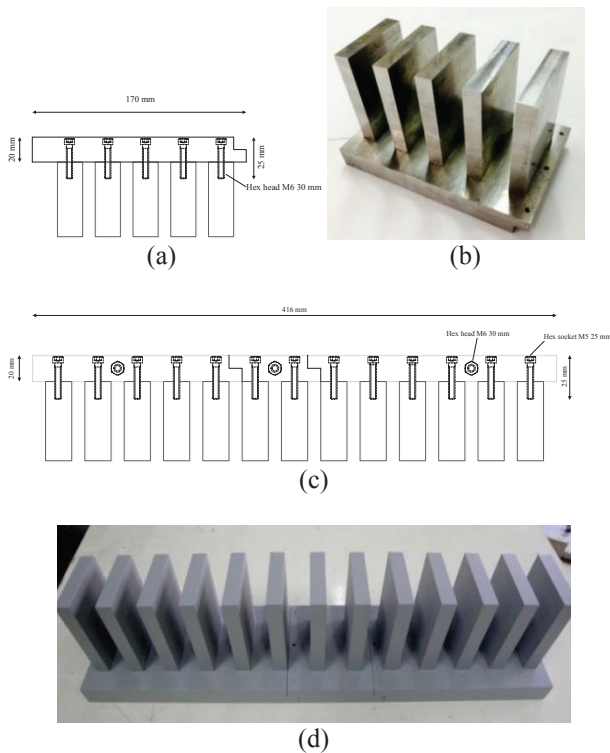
(a) diagram of 5-pole-piece (b) photograph of 5-pole-piece after CNC machining (c) diagram of the combined pole piece (d) 13 poles after combing.
